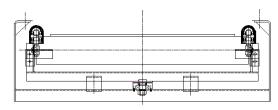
H ARRANGEMENT OF SELF ALIGNING RETURN IDLER BRACKET
